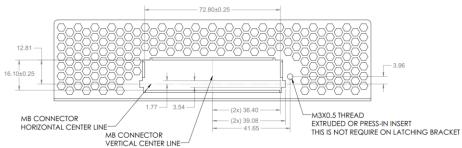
SFF Baseboard Chassis to Card Thumb Screw CTF Dimensions (Side View)
